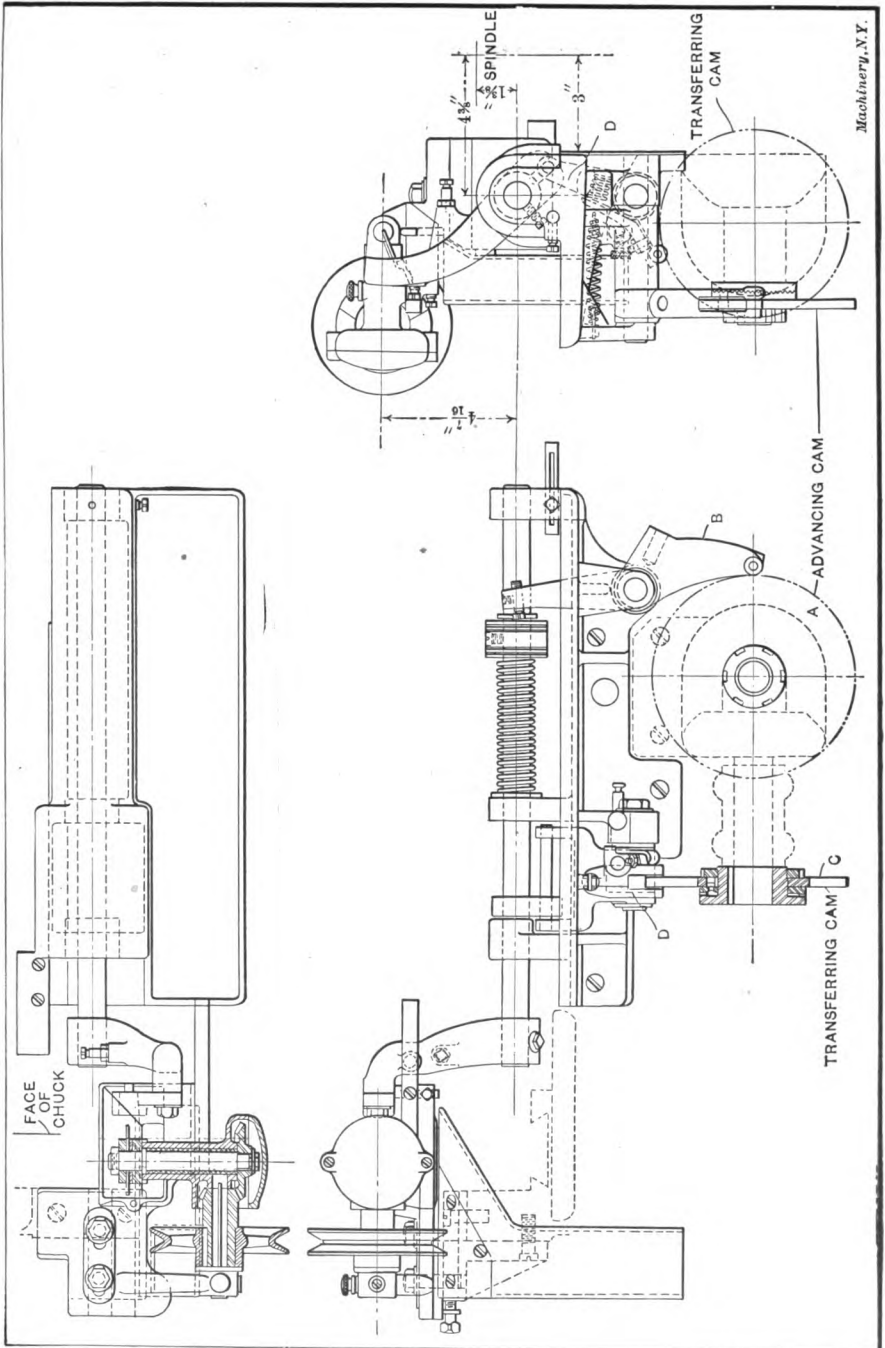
Screw-slottting Attachment for the No. 0 Brown & Sharpe Automatic Screw Machine
